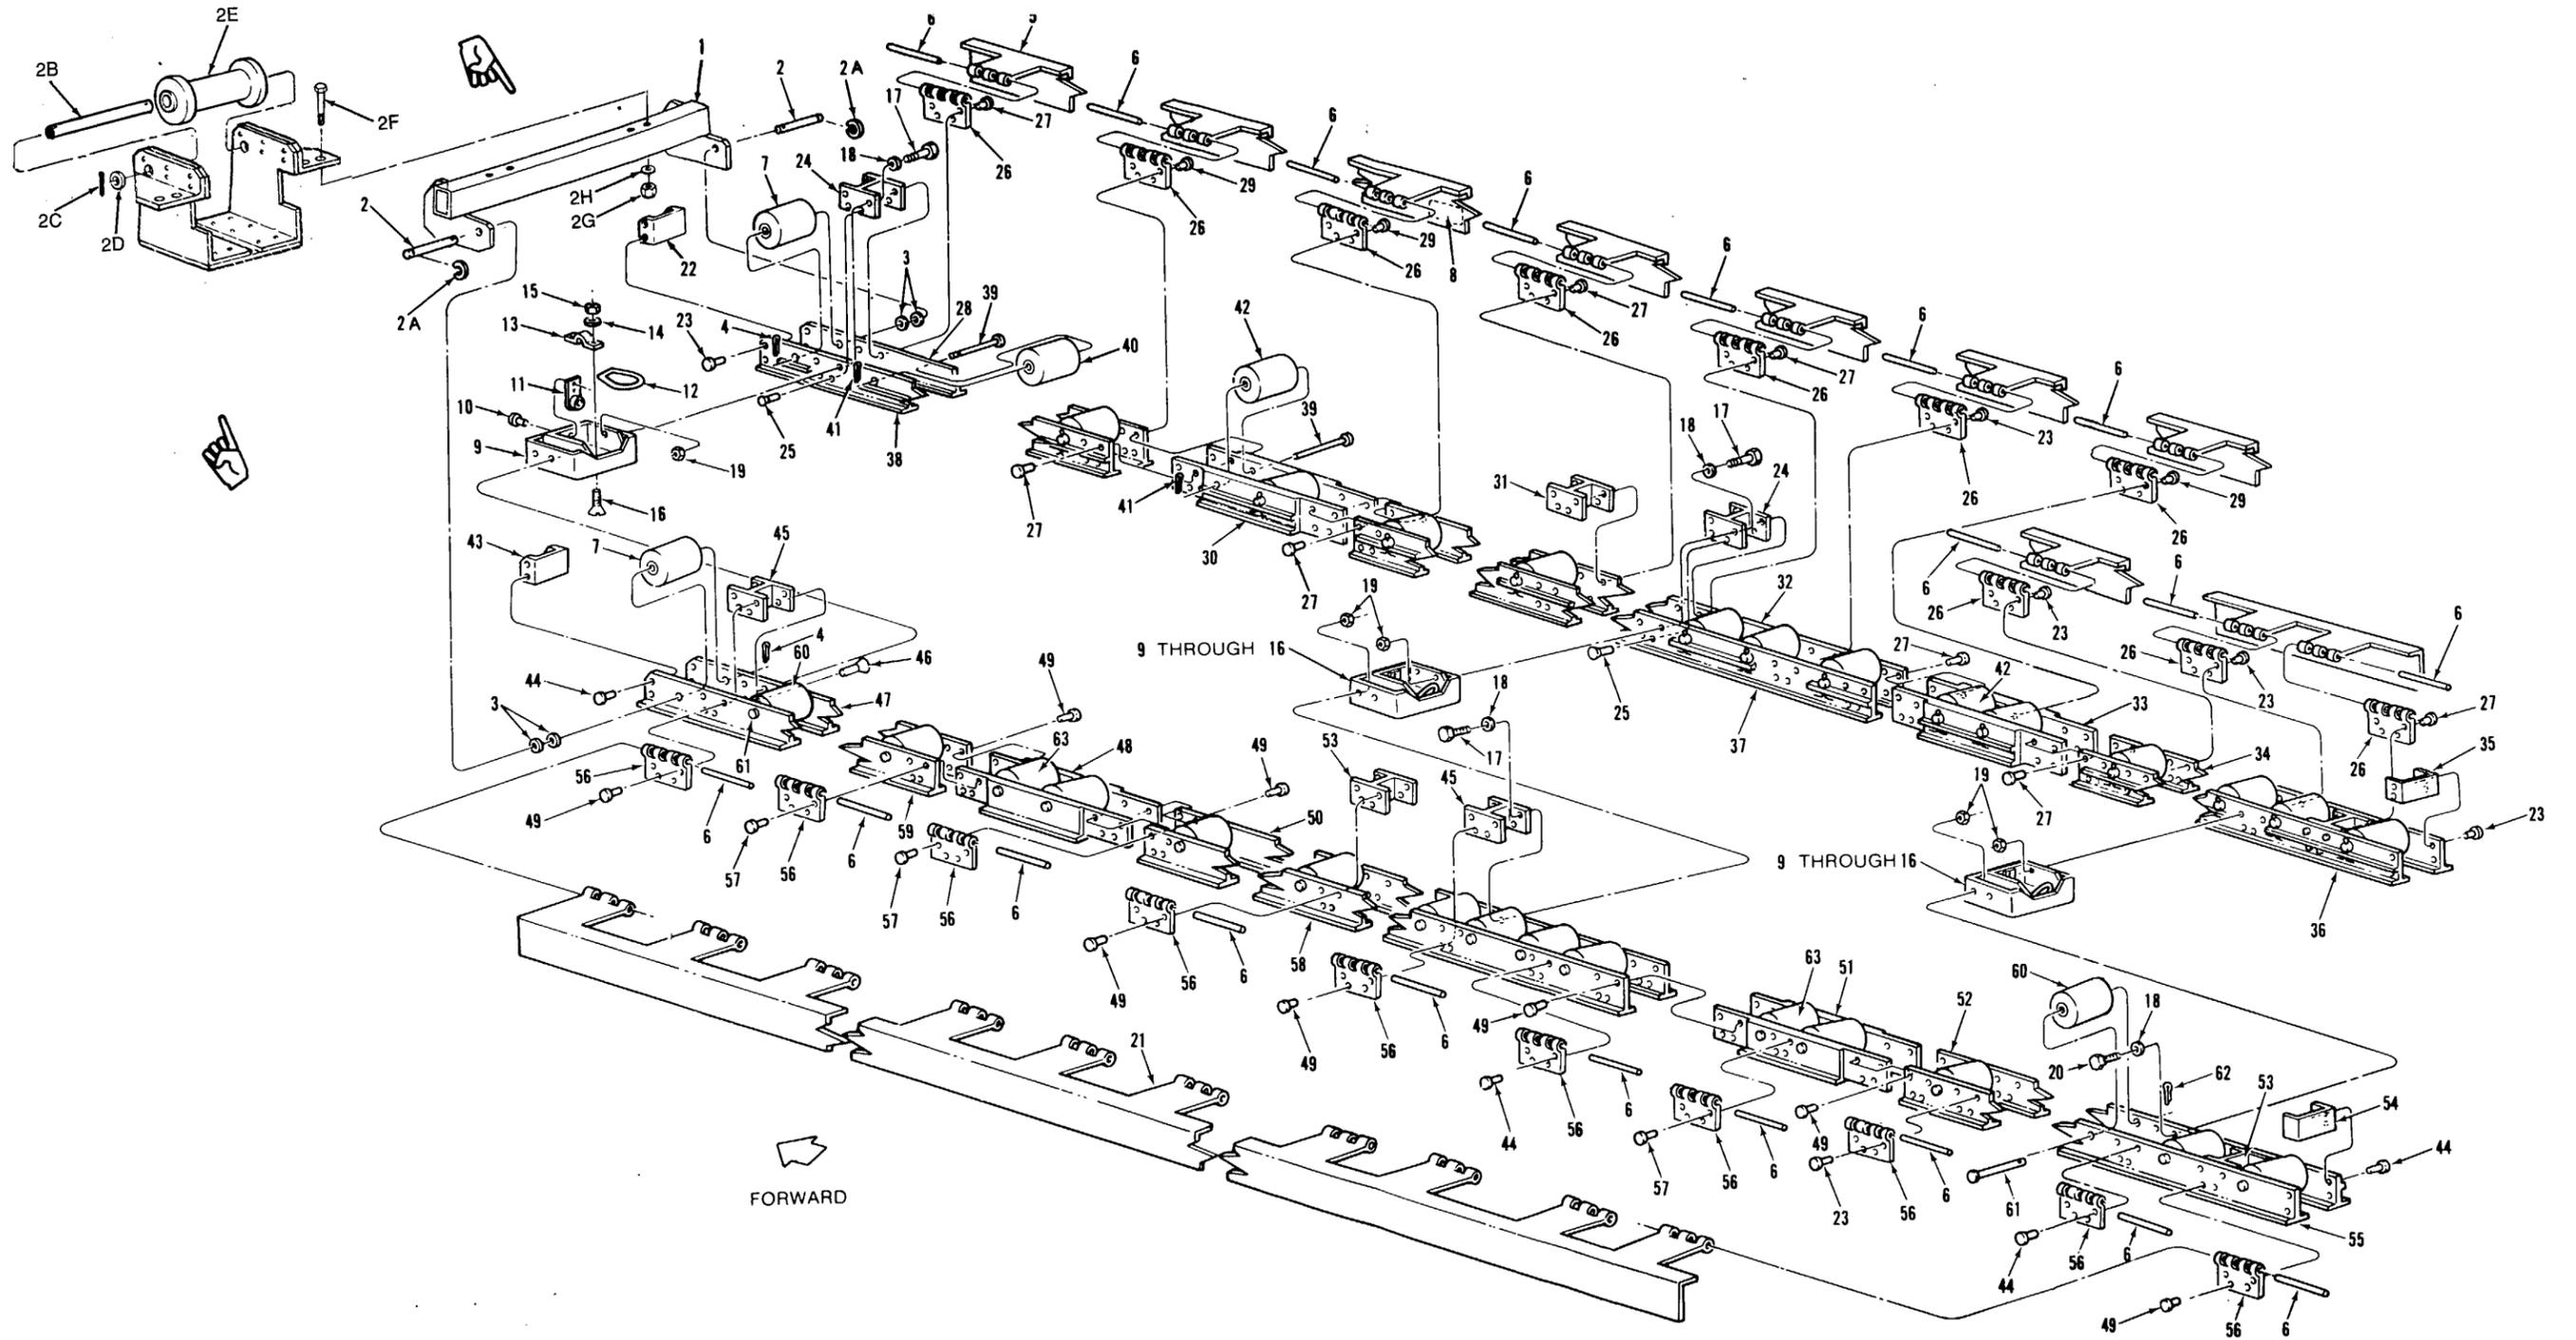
Inboard Guide/Roller Assembly, Stations 272.313 to 377.188
